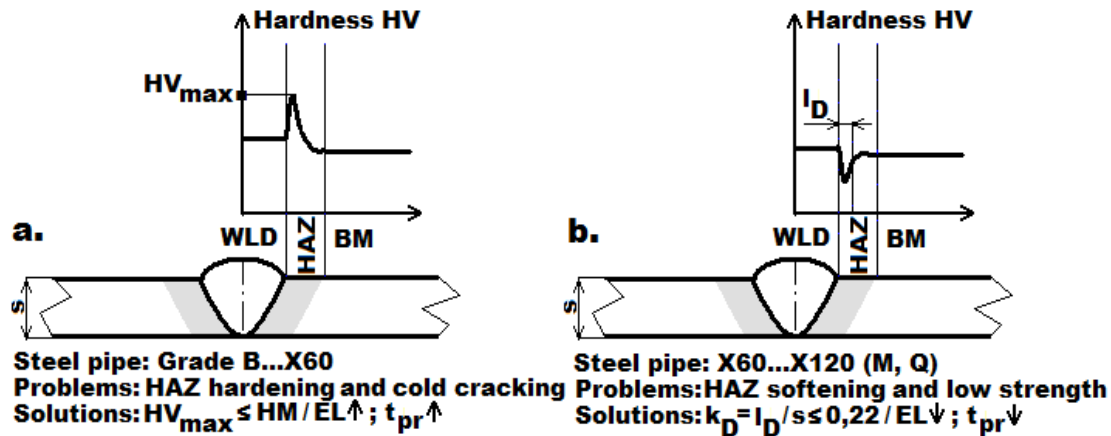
Schematic outline of the technological problems that occur during welding operations when manufacturing welded pipes and/or when constructing NGTP
